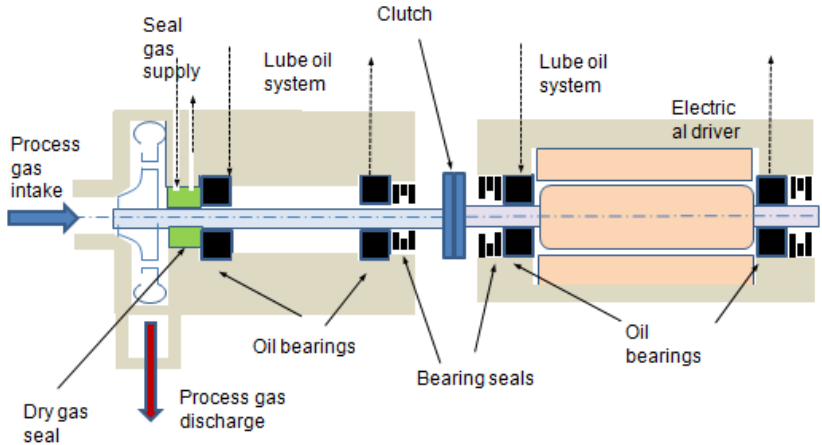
Industrial turbo-compressor equipped with dry gas seals
